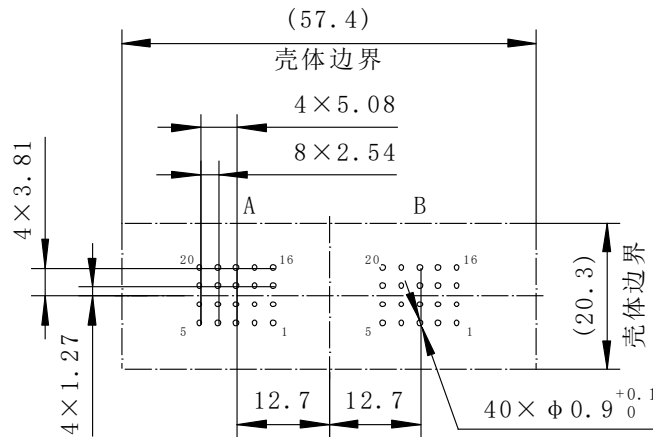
Recommended panel mounting dimensions for two-cavity sockets
